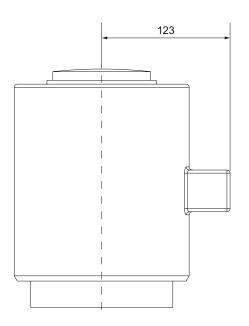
SIWAREX WL270 CP-S SB dimension drawing
